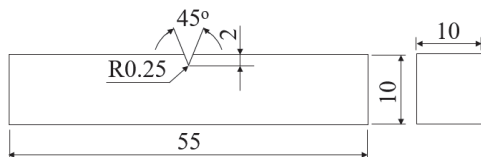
Dimension of the V-notch charpy impact test specimen (unit: mm)
